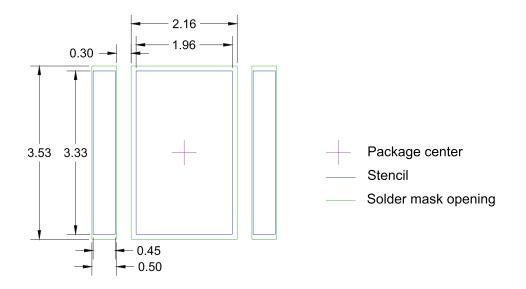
Recommended footprint layout for LUXEON V. All dimensions are in millimeters.
